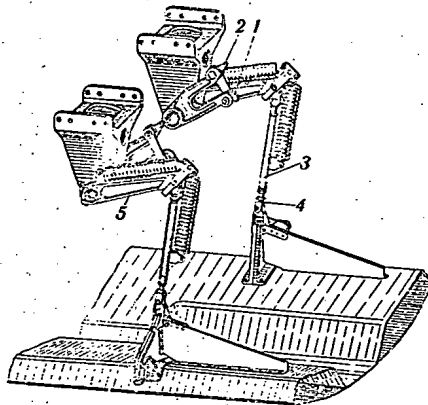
LANDING GEAR NOSE LEG WELL DOORS ACTUATING MECHANISM
